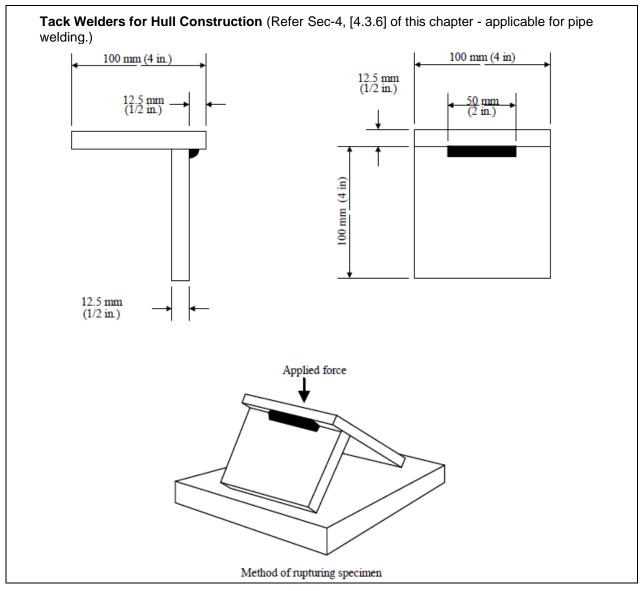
Welder Qualification Test No. Q4
